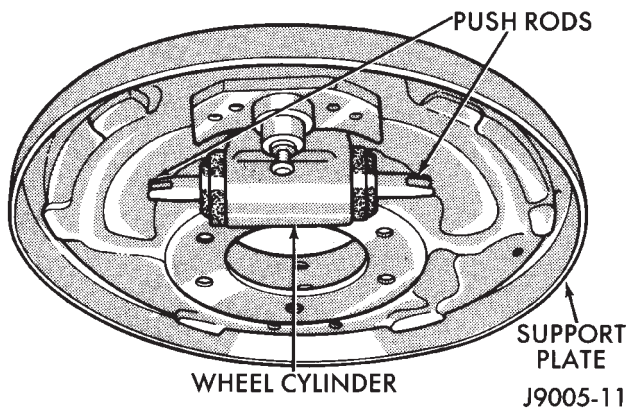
Wheel Cylinder (10-Inch Brake)
